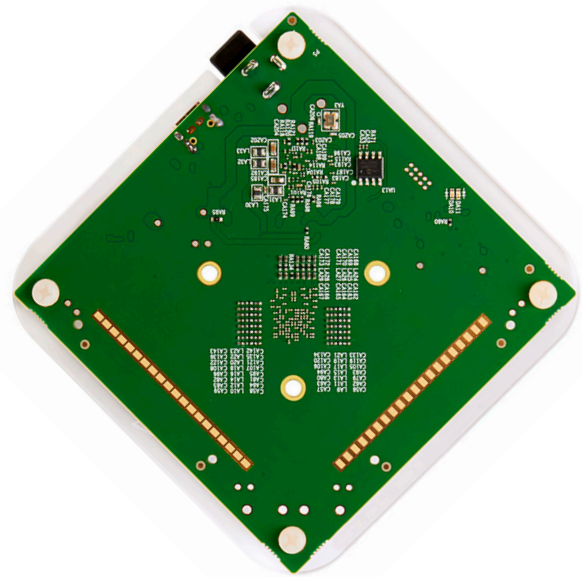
VTRIG-74 RF Sensor Unit PCB Bottom View
